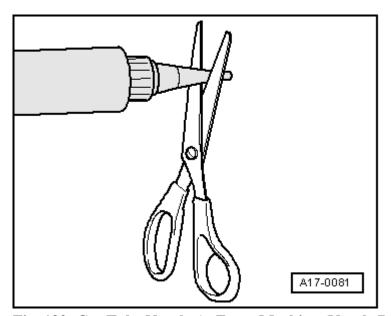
Cut Tube Nozzle At Front Marking (Nozzle Diameter Approx. 3 Mm)
